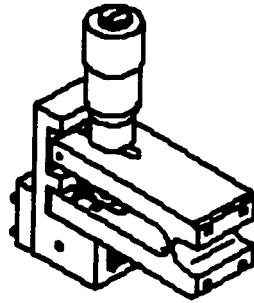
(a): Micrometer-piezoelectric actuator axis position jig (explode view)
